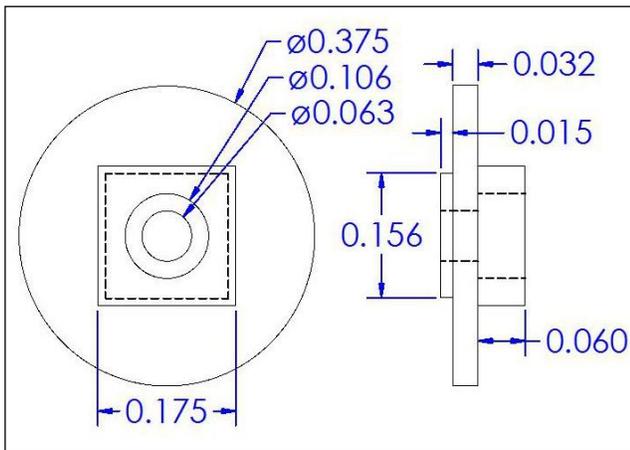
Construction drawing of the hand washer. The material is mild steel.
